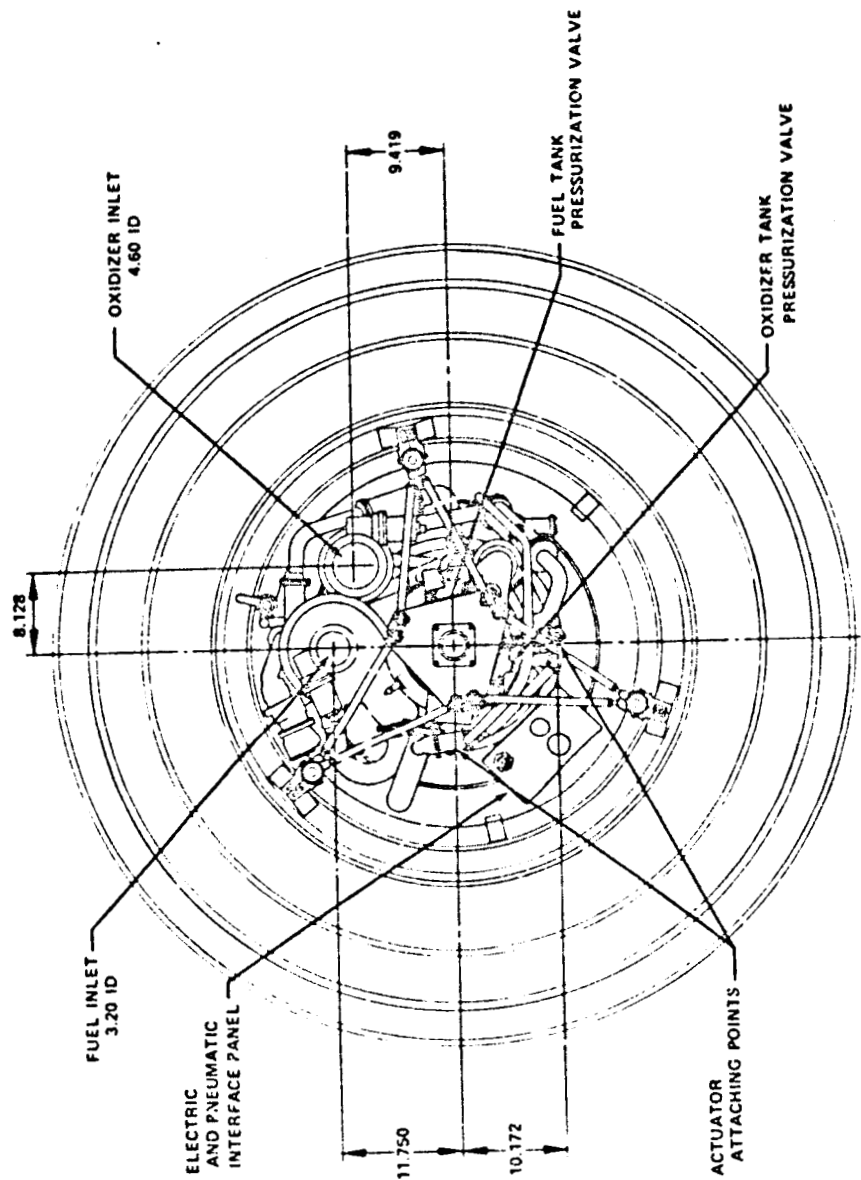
Derivative IIA Engine Installation Drawing (Sheet 2)
